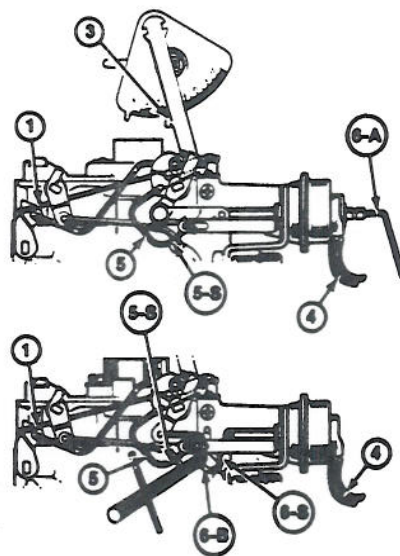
Primary vacuum break adjustment w/single break unit. 1983-86 E2SE carburetor
